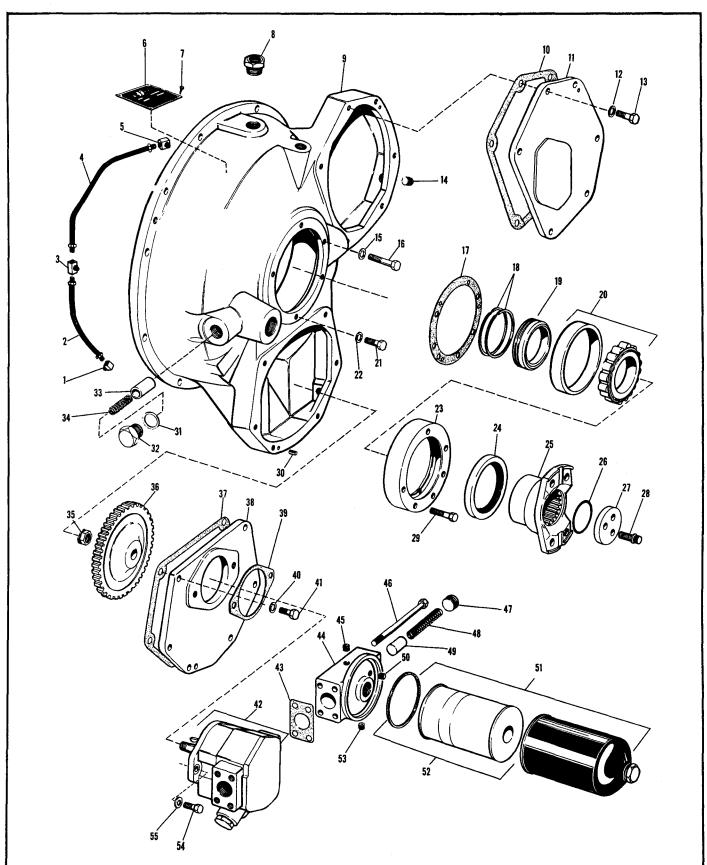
Model 6-F-1514 Series Single-Stage Torque Converter - Exploded View.
